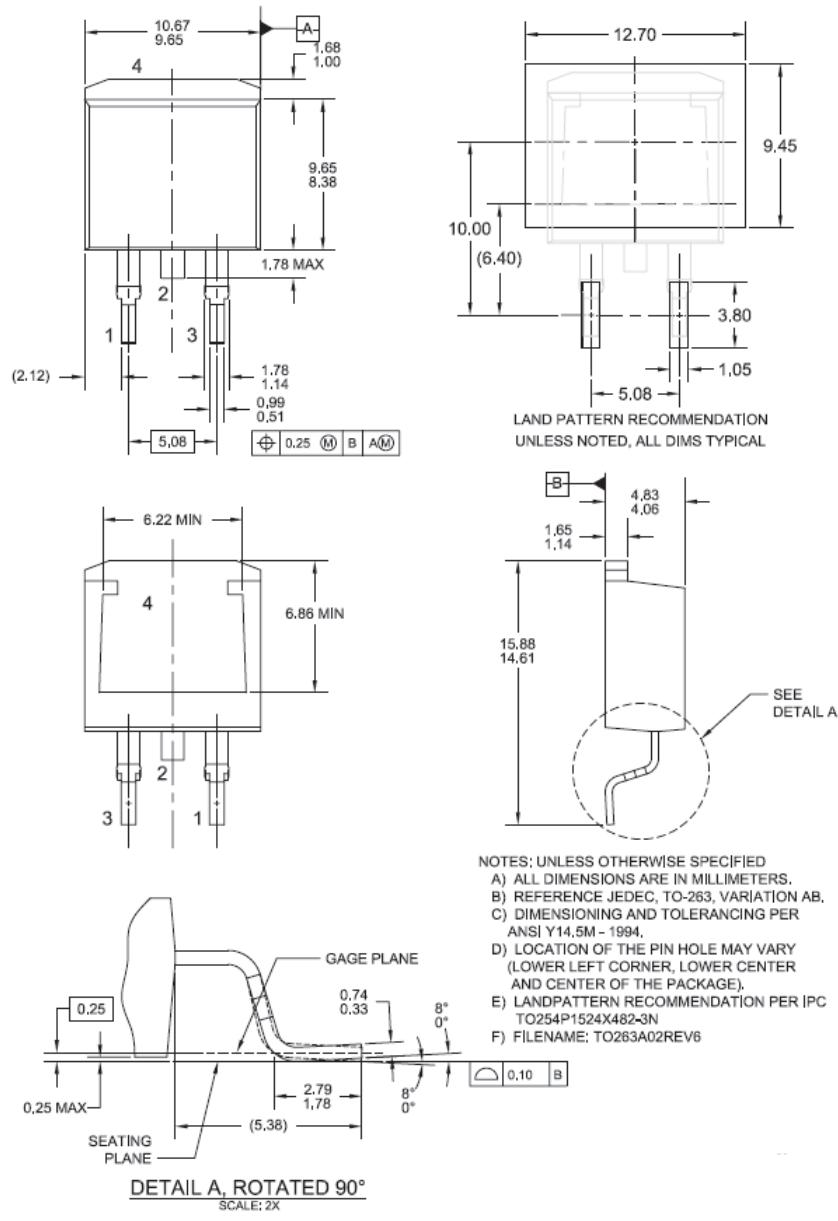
TO263 (D²PAK), Molded, 2-Lead, Surface Mount
